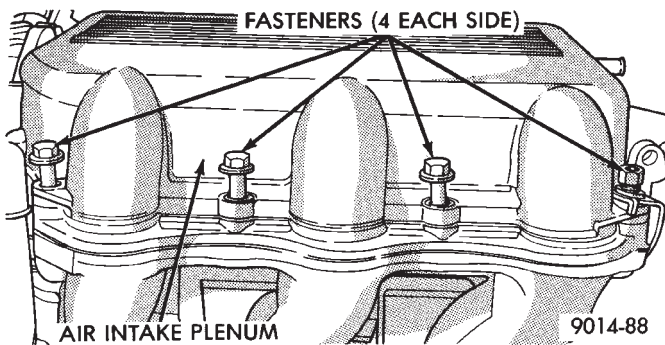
Air Intake Plenum to Intake Manifold Attaching Bolts
